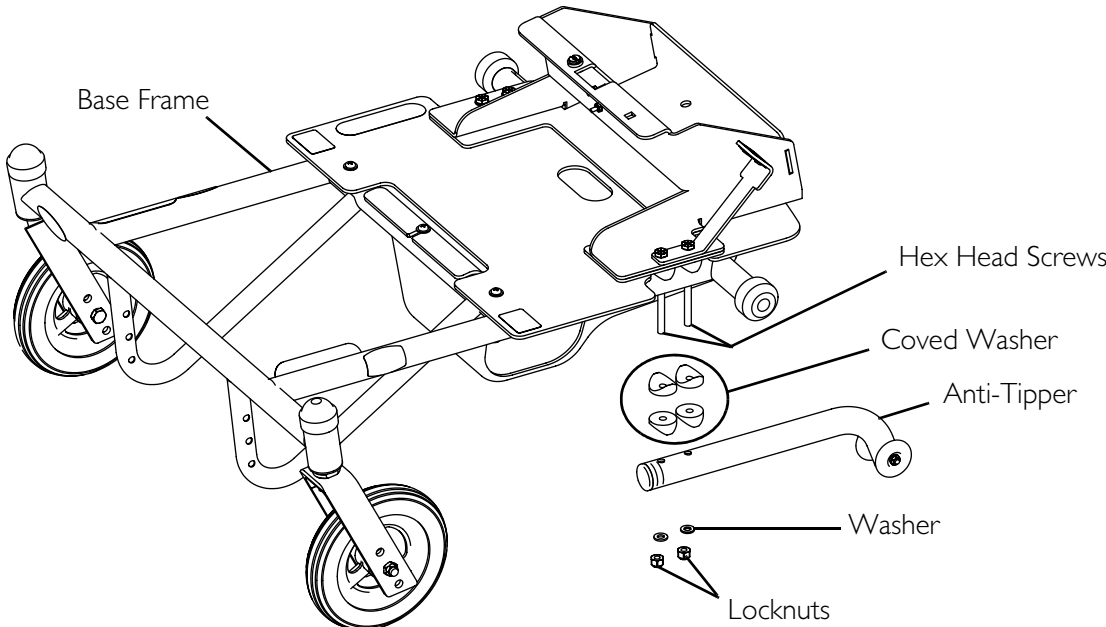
Removing/Installing the Anti-Tippers - At'm QT
